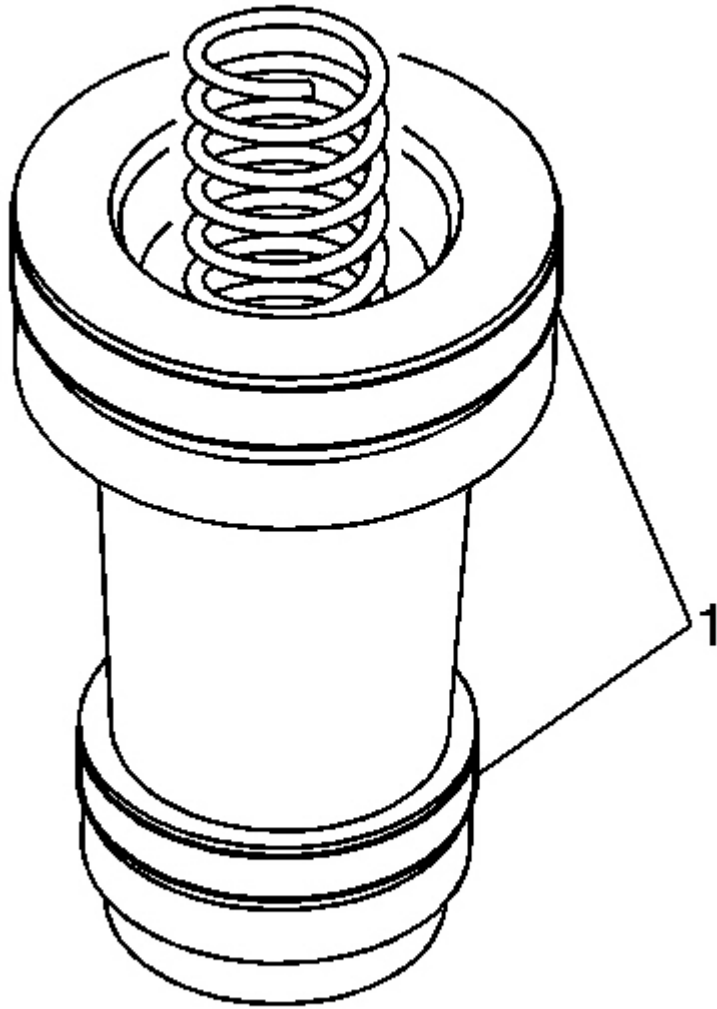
O-Rings & Forward Clutch Accumulator Piston
